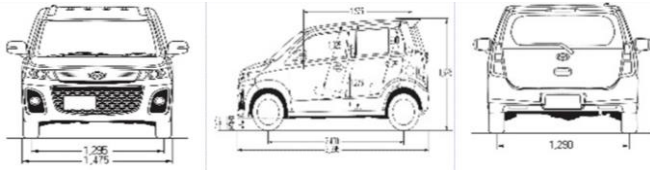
Blueprints of Suzuki Wagon R 2012 (a) Front view (b) Side view (c) Back view
